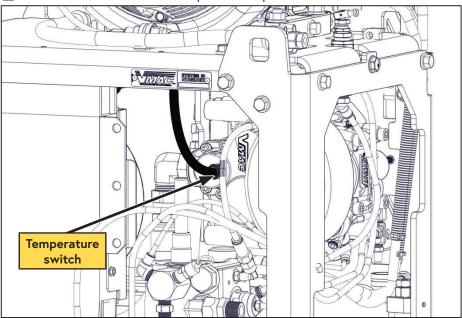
Compressor temperature switch removal (some components removed for clarity)
